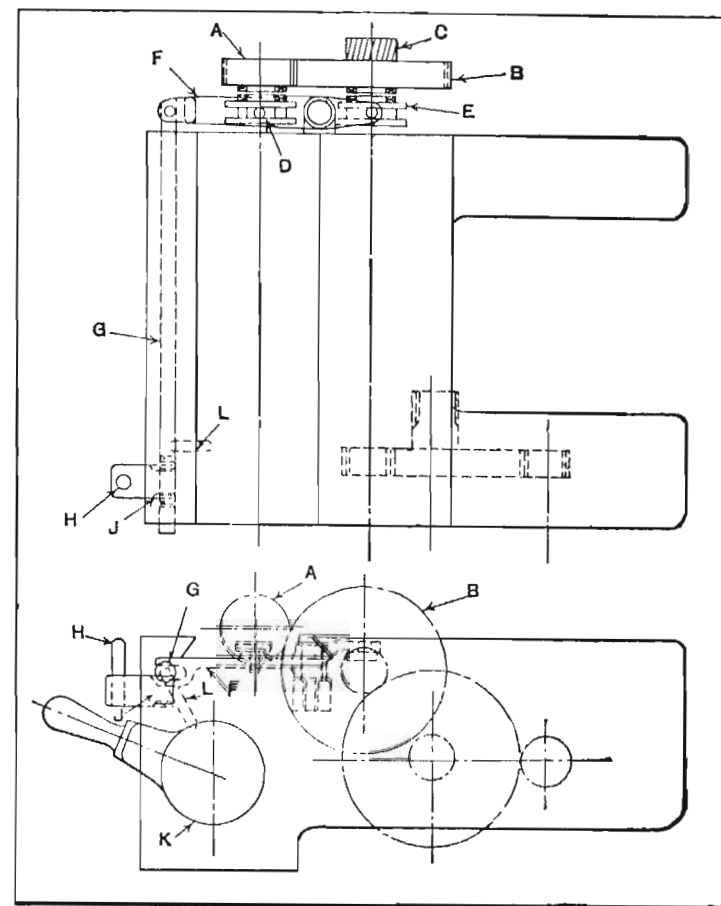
Back-shaft Type of Lathe Saddle with All Feeds Interlocking
